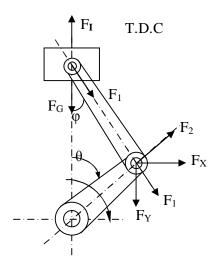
The Mechanism of The Crankshaft, Connecting Rod and Piston.
